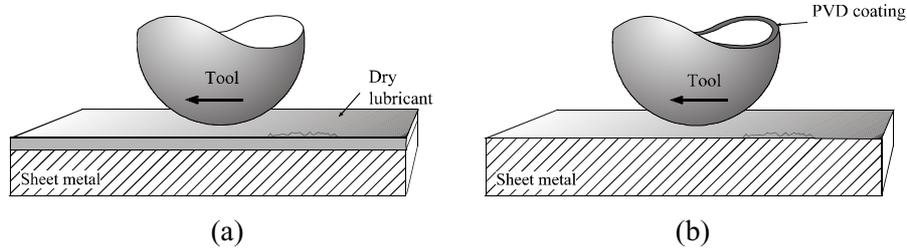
Surface engineering concepts evaluated in this thesis. (a) Deposition of a dry lubricant on the metal sheet and (b) deposition of a low friction (anti-sticking) and wear resistant PVD coating on the forming tool.
